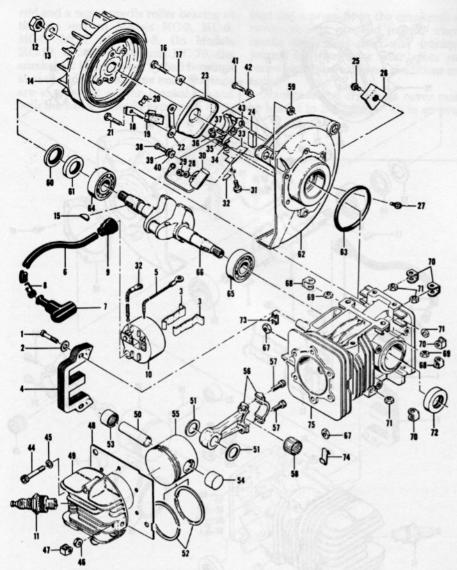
Exploded view showing construction of Models MC-20, MC-30, MC-40 engines. Model MC-45 is similar except for nine-port crankcase. Model MC75 is also similar except for nine-port crankcase and gasket is used instead of "O" ring (63).
